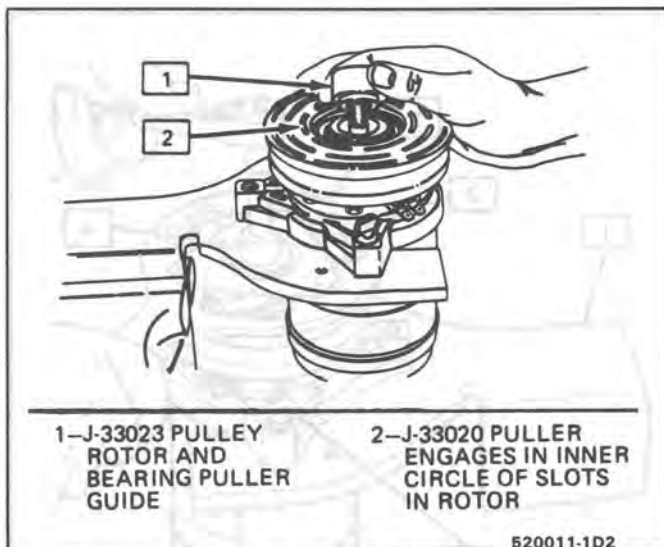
Installing Pulley Rotor/Bearing Puller Guide
